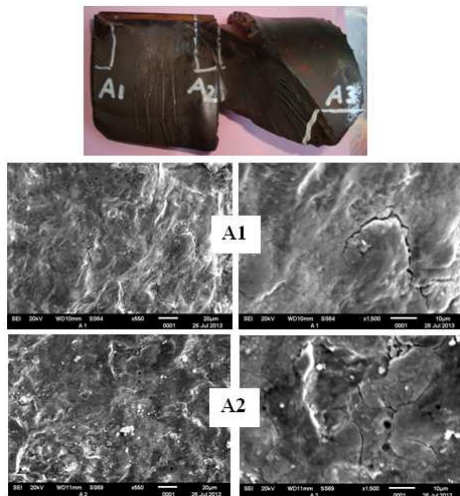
SEM microfractographs obtained from fracture surface of the broken quill shaft A around the fatigue crack initiation sites A1 and A2, respectively
